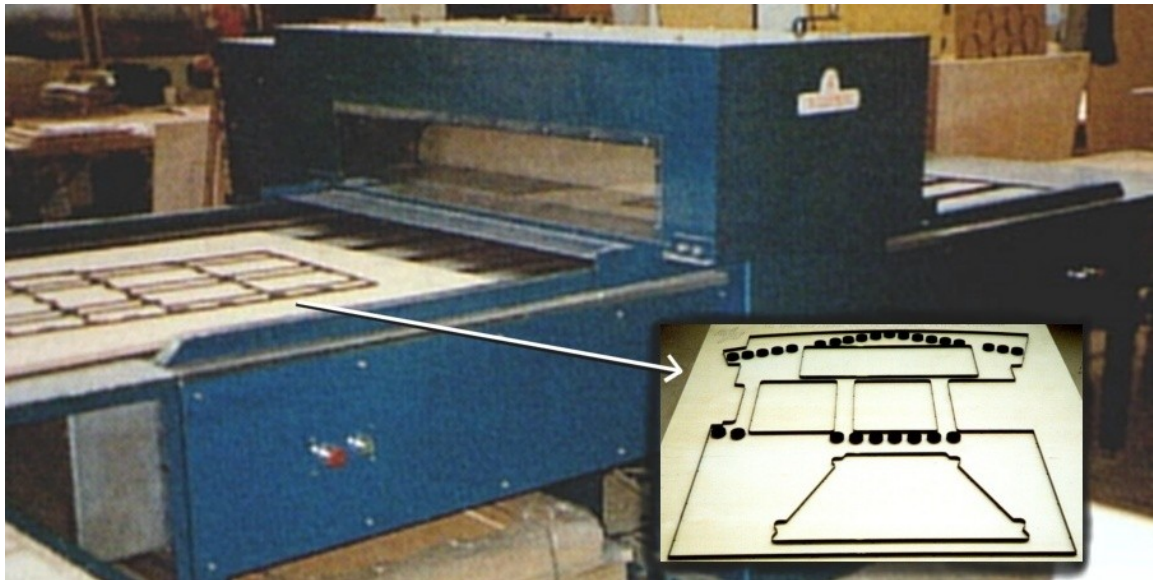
CUTTING FORM AND FIXTURE.
